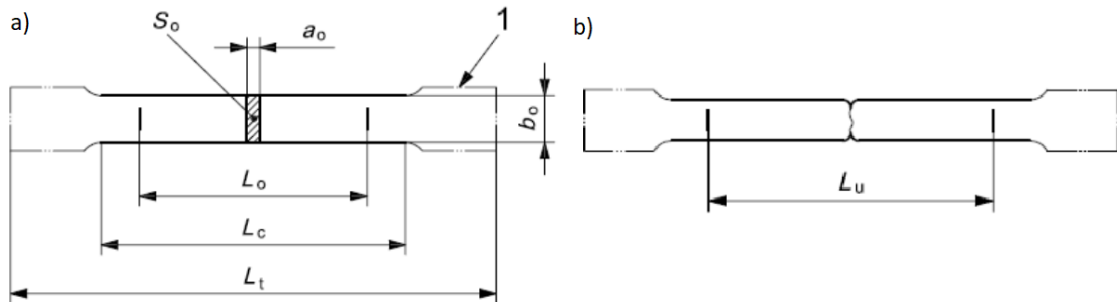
Example of a flat test specimen with rectangular cross-section a) before and b) after testing, with essential dimensions (L_t – overall length of a test specimen, L_c – parallel length, L_0 – original gauge length, S_0 – initial cross-section of the tested area, a_0 – initial thickness of a flat test specimen, a_0 – initial width of parallel length of a flat test specimen, L_u – final gauge length after fracture) [12]
